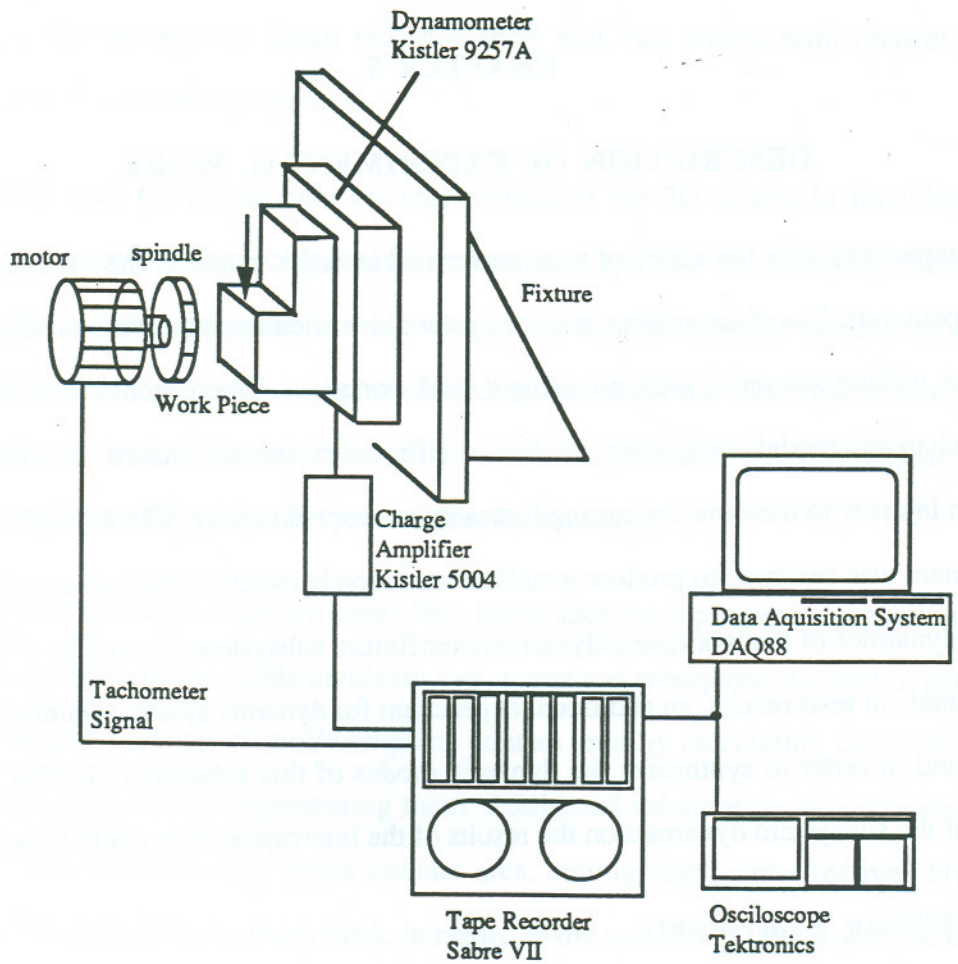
Experimental Set-Up for Face Milling Cutting tests.
